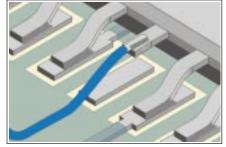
Acceptable* Wire soldered to clipped component lead. +
